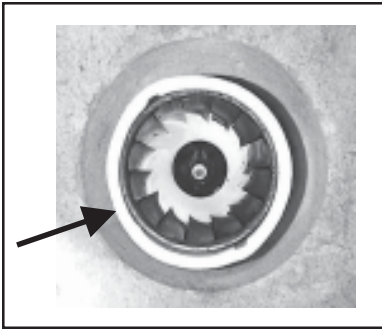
Sizes 350 and 500, position the “opening” liner sleeve with the outer edge even with the front opening.
